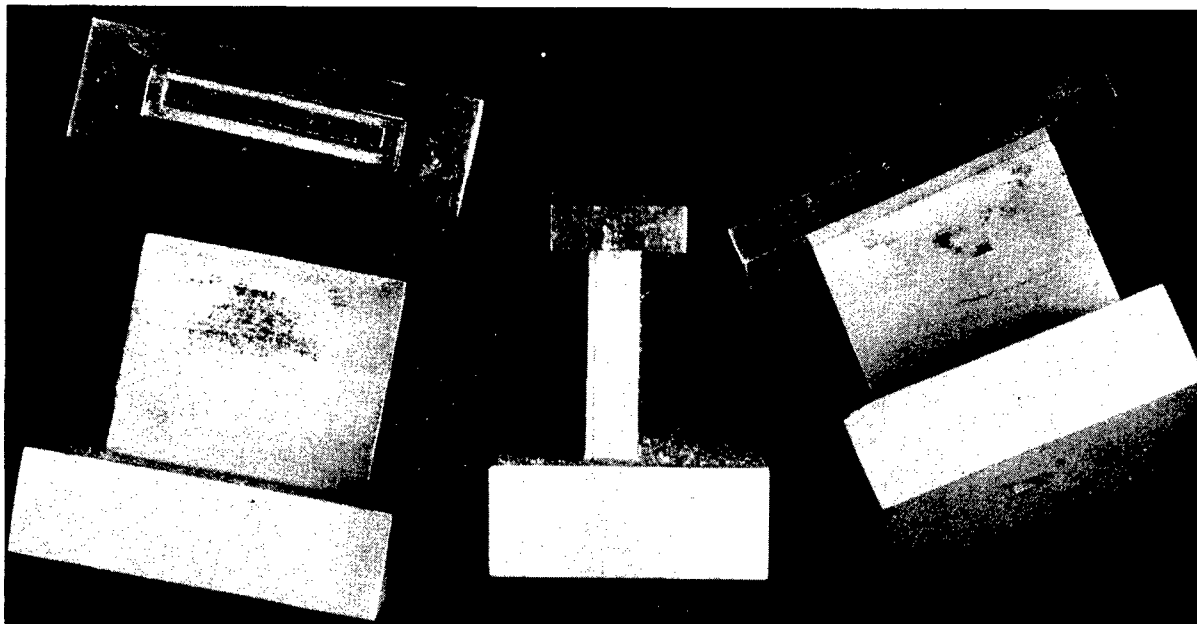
Rectangular Blade Used as Finishing Tool for EDM Tip-Caps.
